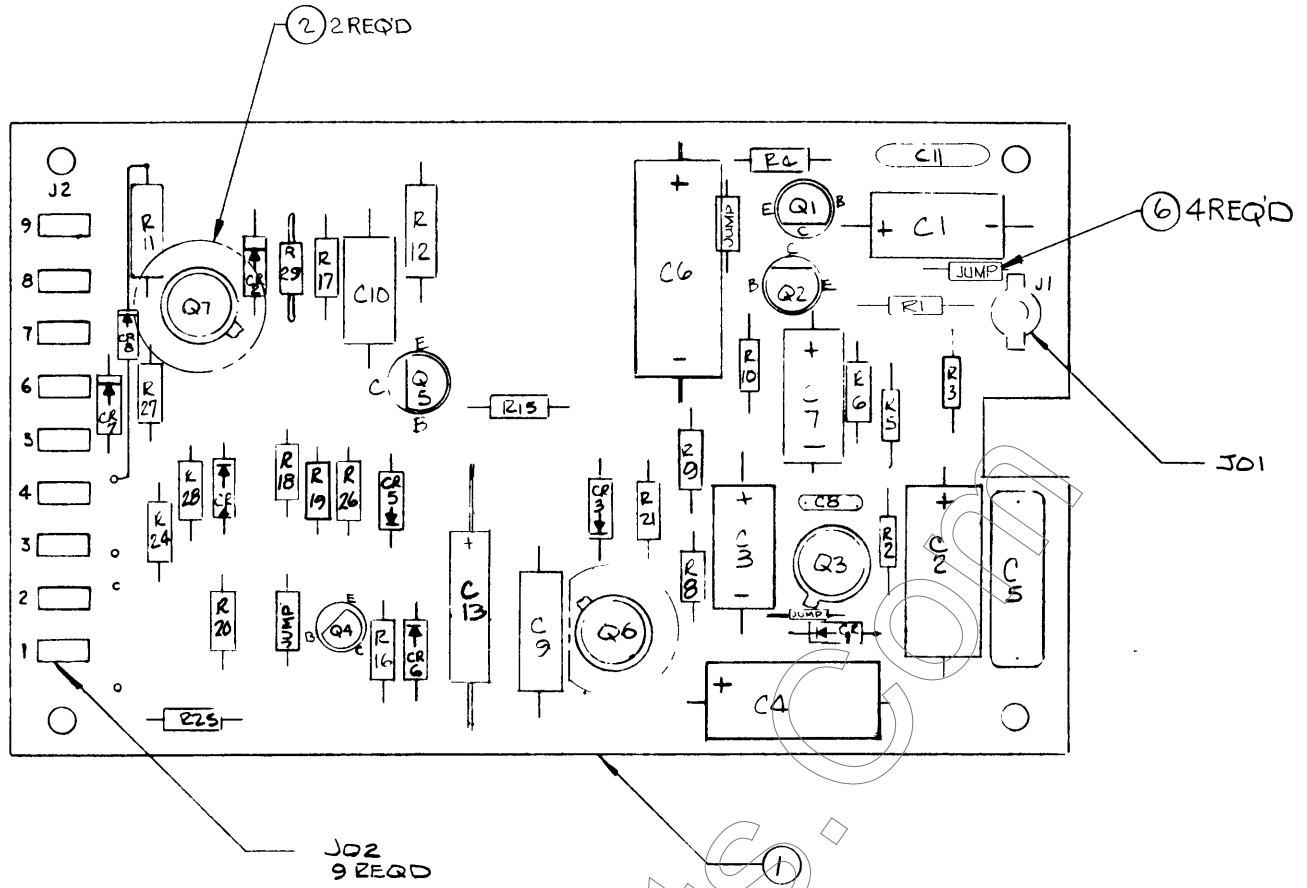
Electronic Part Locations (2C880-5), Power Driver PCB Assembly
